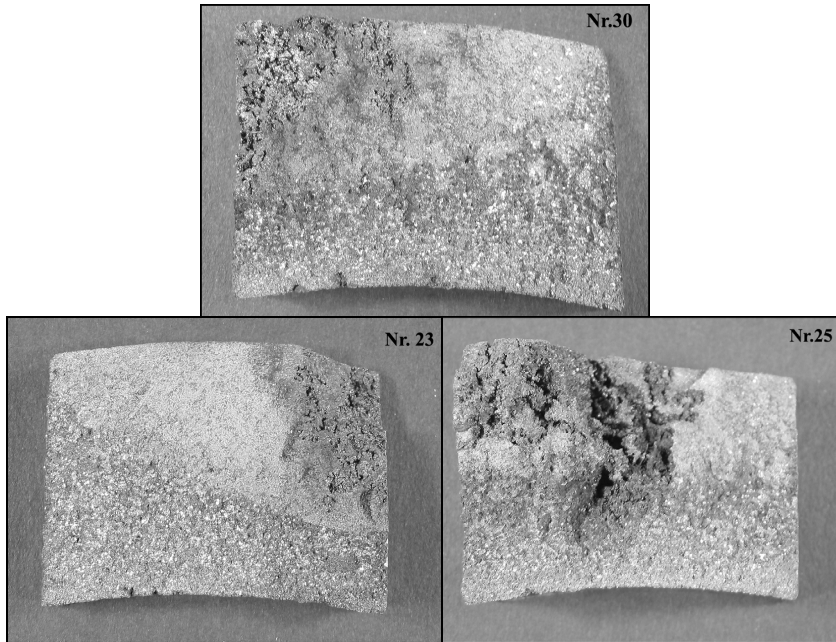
Images of fracture surfaces that contain major defects.
